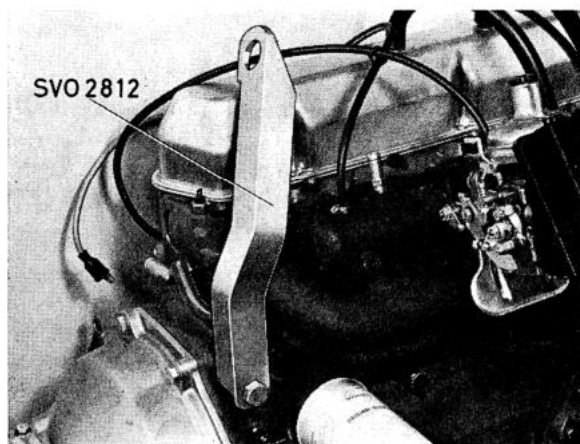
Lifting arm SVO 2812 on rear end of engine
